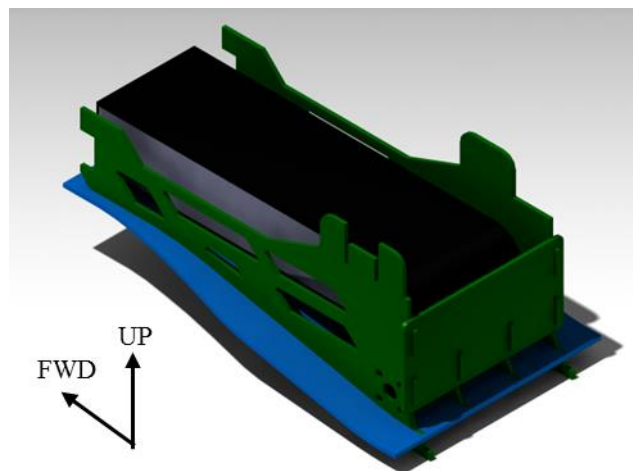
CAD model of the fixed-wing UAS battery subassembly
